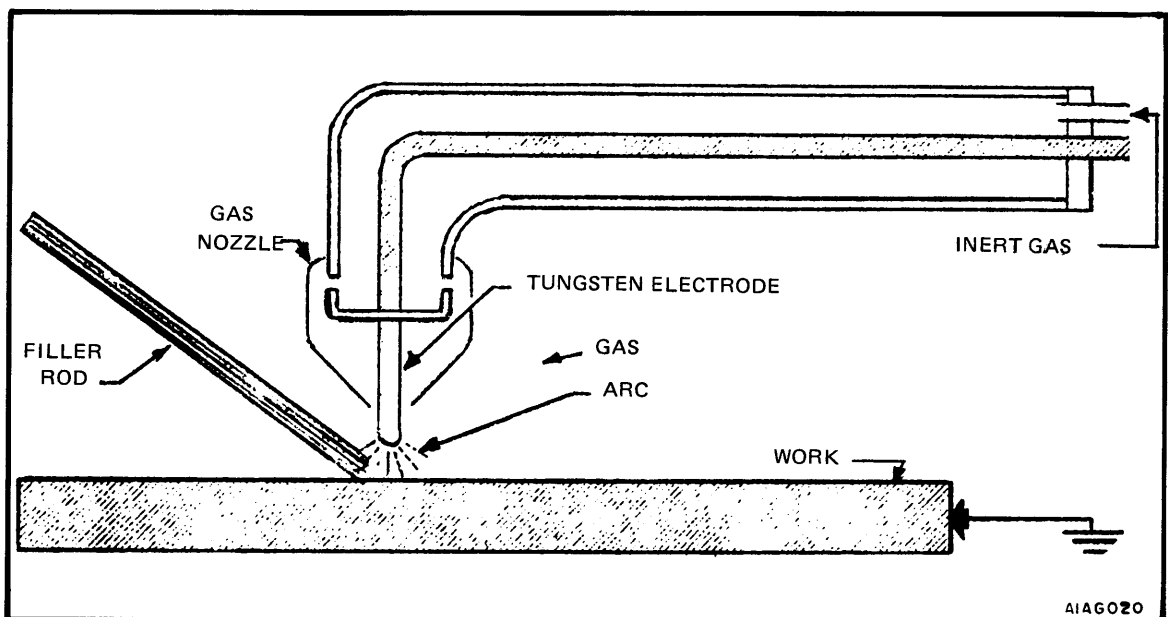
Inert-Gas Tungsten-Arc Welding
